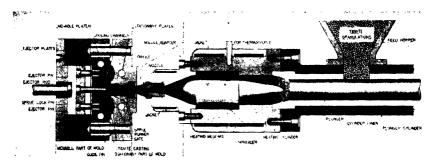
Sectional View Illustrating General Method of Injection Molding. (Courtesy of Tennessee Eastman Corp.)
